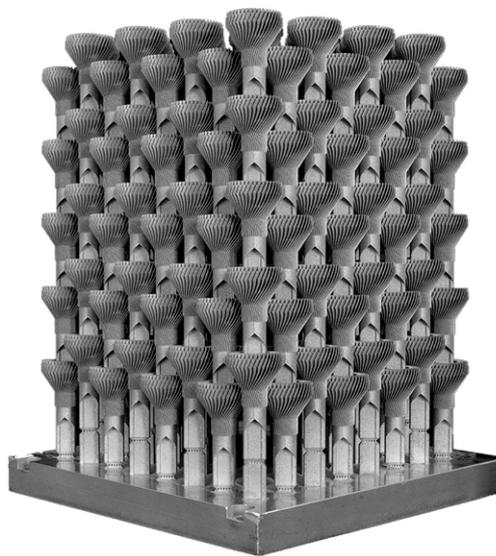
384 LED headlight heatsinks produced in a single build on a PBF-LB machine (Courtesy Betatype)
